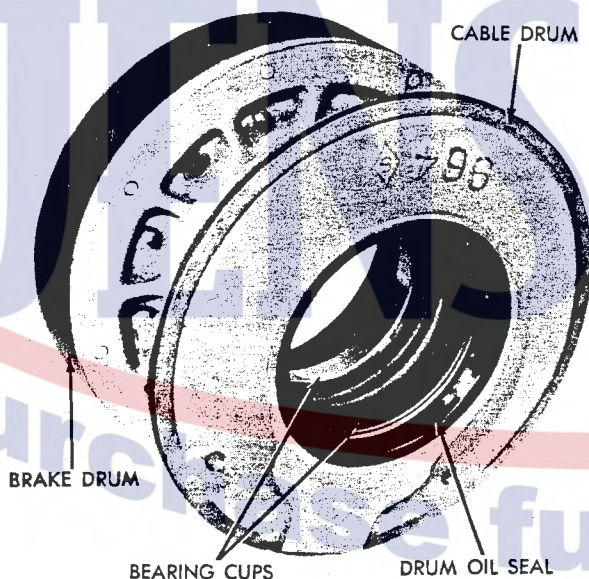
Cable Drum Oil Seal - Installed (T-16217)
